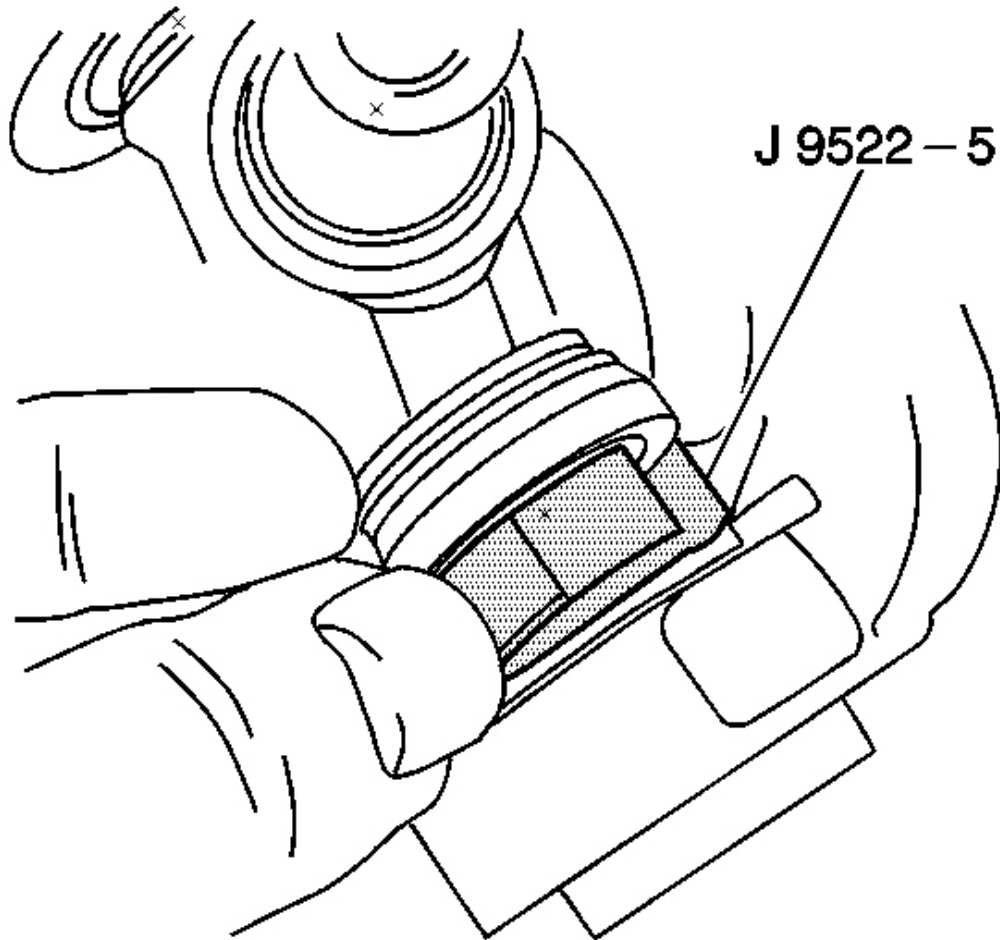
Placing J 9522-5 Between The Seal & Bearing Cup
